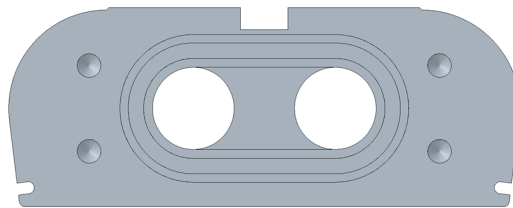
New single piece magnet design with tapered profile to be used on all future APS-U SCUs.
